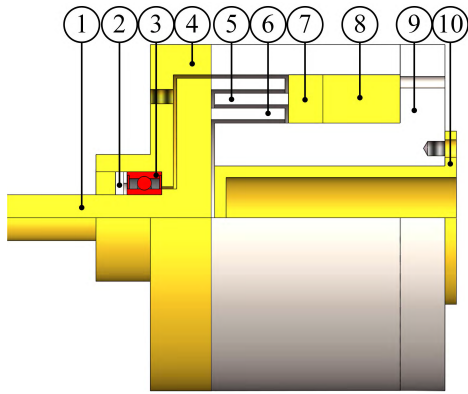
Hollowed multi-drum brake structure. (1) Shaft, (2) magnetic ring, (3) sealed bearing, (4) non-magnetic front casing, (5) stator, (6) rotor, (7) stator holder, (8) coil, (9) magnetic rear casing, and (10) non-magnetic inner casing.
